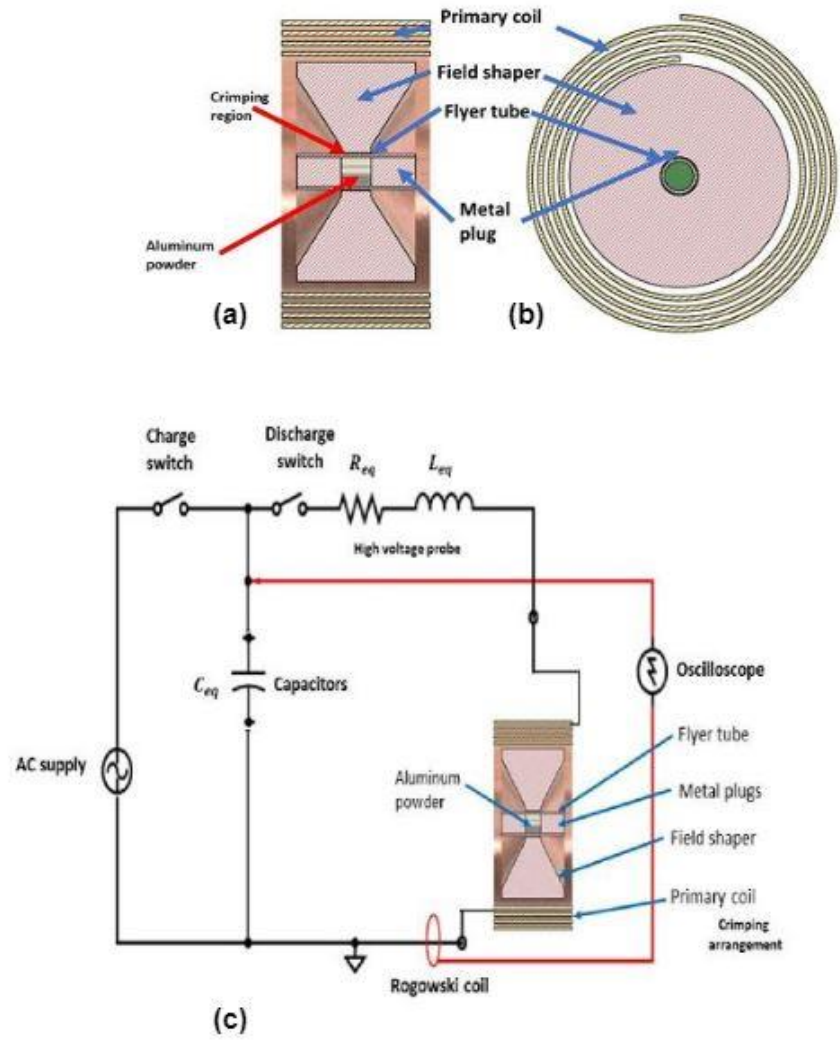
Schematic of high velocity compaction using Electromagnetic Compaction Technique. (a) side cross-sectional view field shaper and coil assembly (b) front view of field shaper and coil assembly (c) Circuit Diagram of EMC setup.
